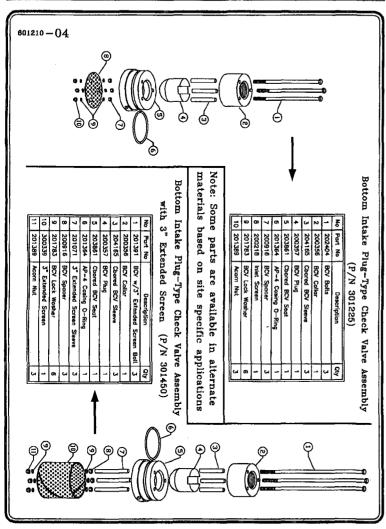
Bottom Intake Plug-Type Check Valve Assembly
